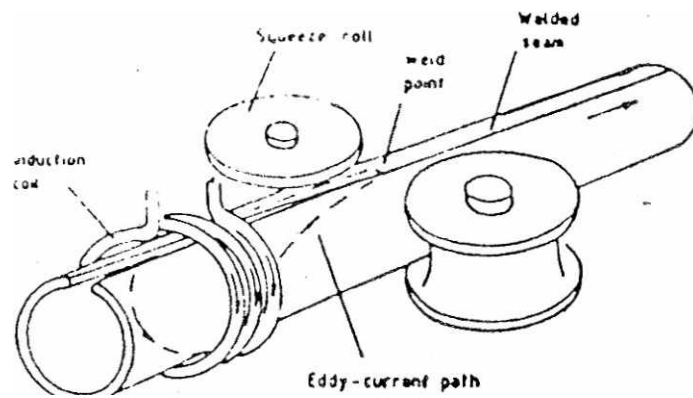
Eddy-current path in high-frequency induction welding of tubular products
